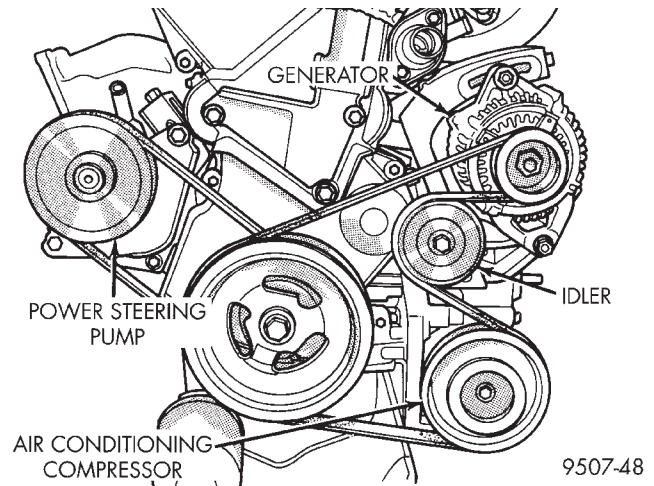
Air Conditioning Compressor/Generator Belts—2.4L
